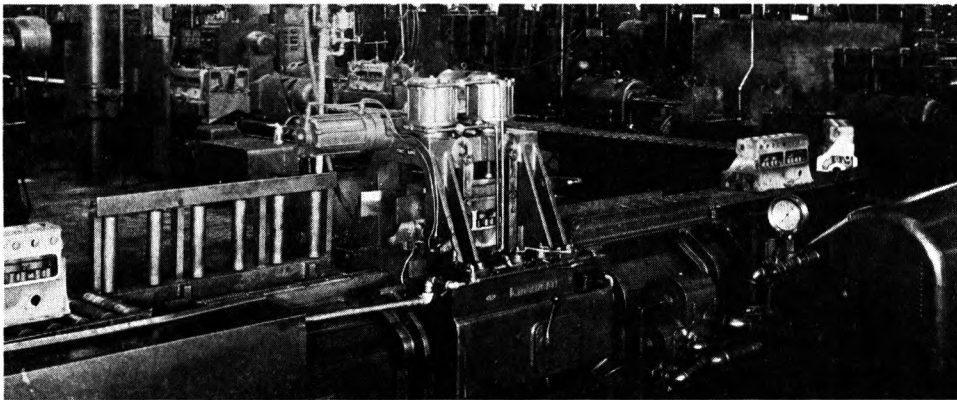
HORIZONTAL TYPE, HYDRAULICALLY OPERATED MACHINE BROACHING BEARING-CAP SLOTS
